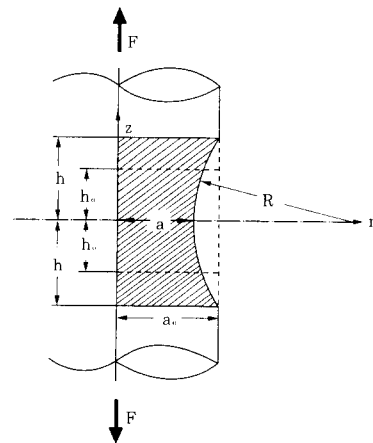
Deformation of a welded-joint with a soft interlayer
